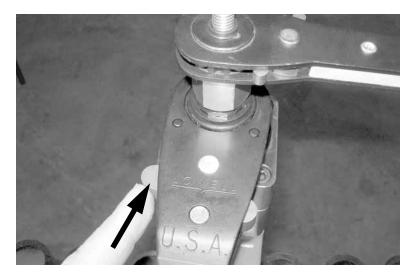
Push the knob on the feed handle to the feed forward direction. The handle will engage clockwise to feed the tool head toward the tube end.
